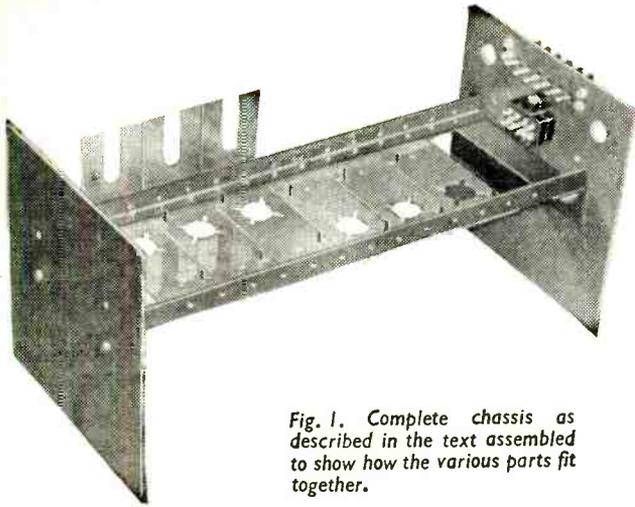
Complete chassis as described in the text assembled to show how the various parts fit together.
